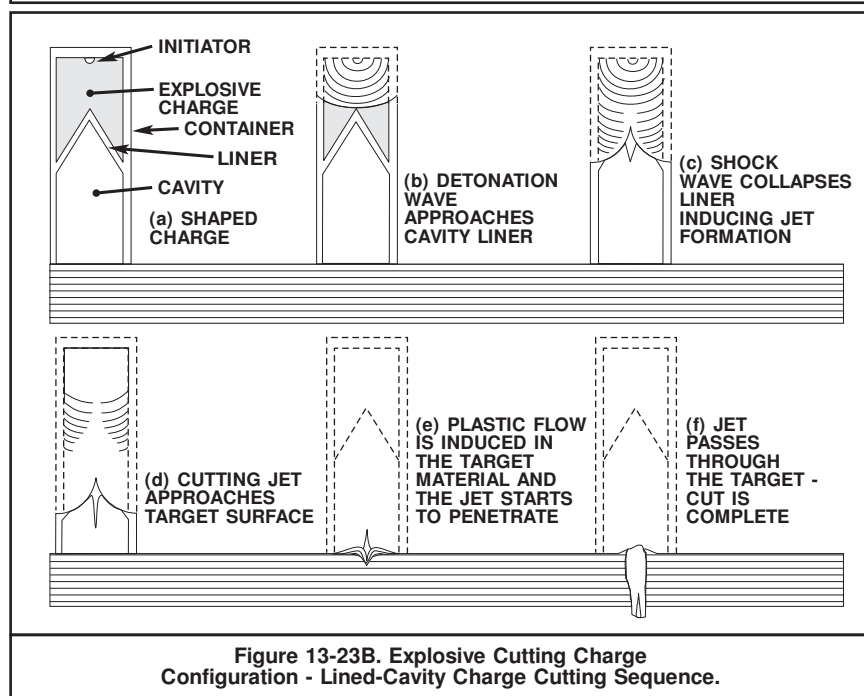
B. Explosive Cutting Charge Configuration - Lined-Cavity Charge Cutting Sequence.
